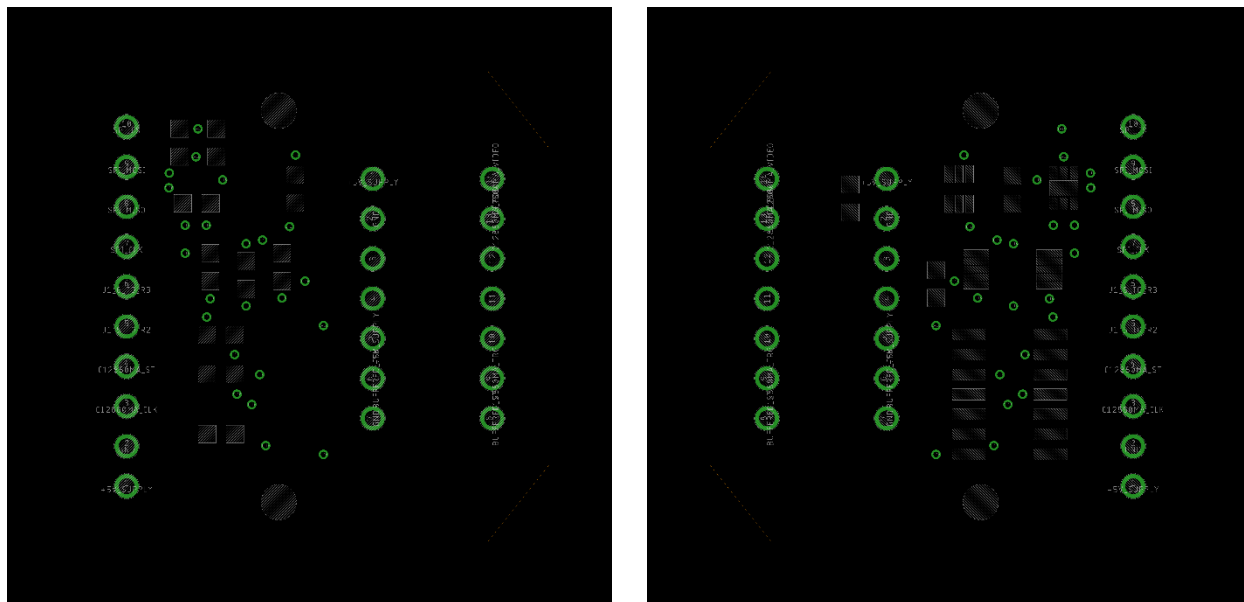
Top and bottom layer solder mask of the driving board for the UV-VIS spectrometer including all vias and pads.
